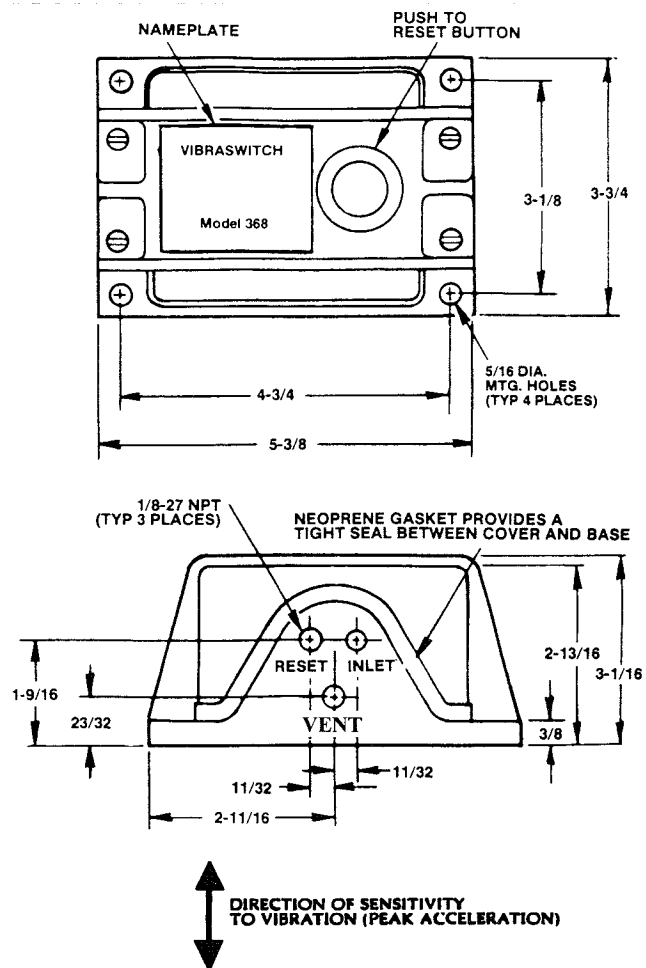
Mounting Dimensions for the Vibraswitch, Model 368.
